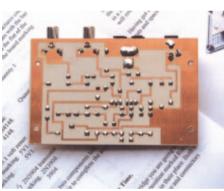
The completed p.c.b., showing underside ready for final installation and testing (see text).
